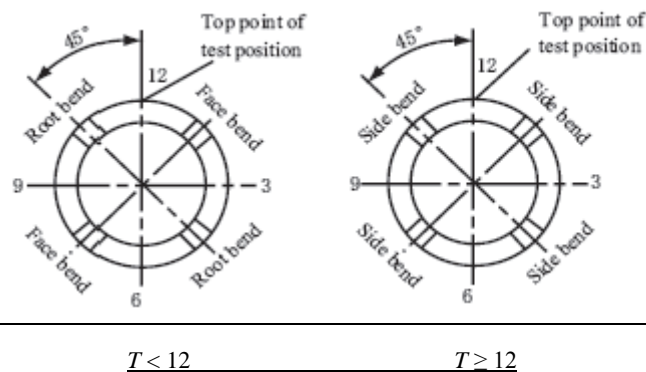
(a) Sampling Position of Bend Test Specimen for Butt Weld Joints of Pipes (Initial Qualification Test)
